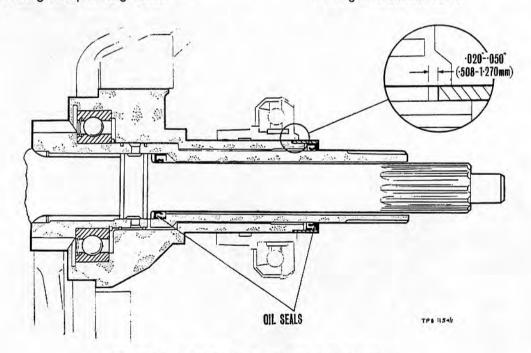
MAIN DRIVE SHAFT RETAINER OIL SEALS
